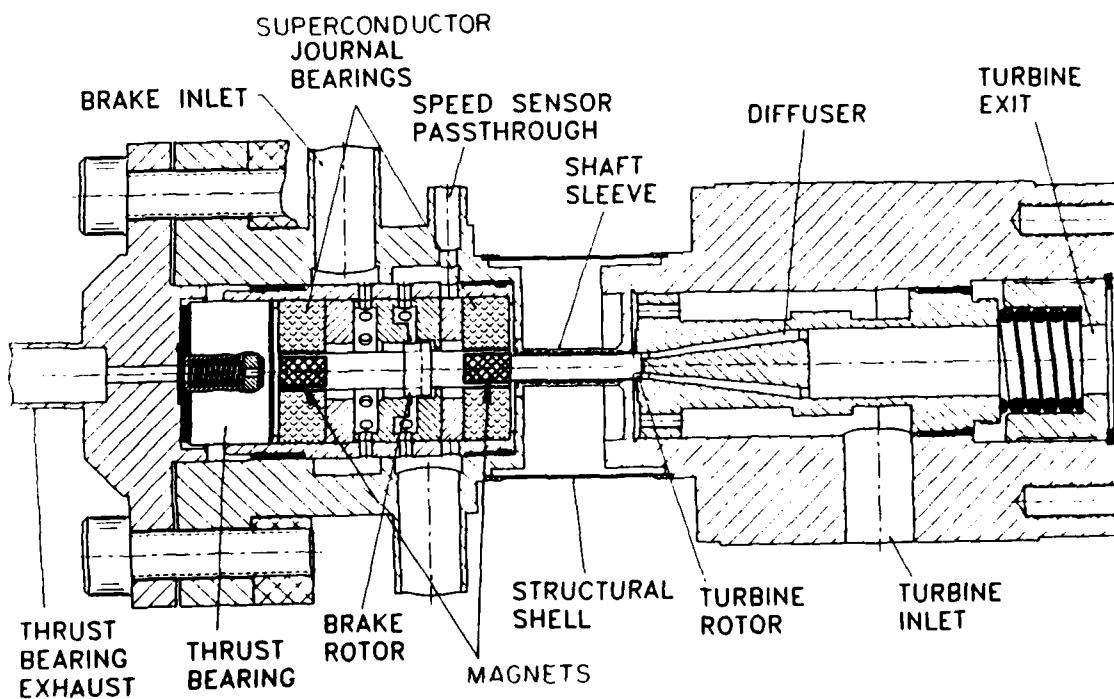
TURBOEXPANDER ASSEMBLY LAYOUT
